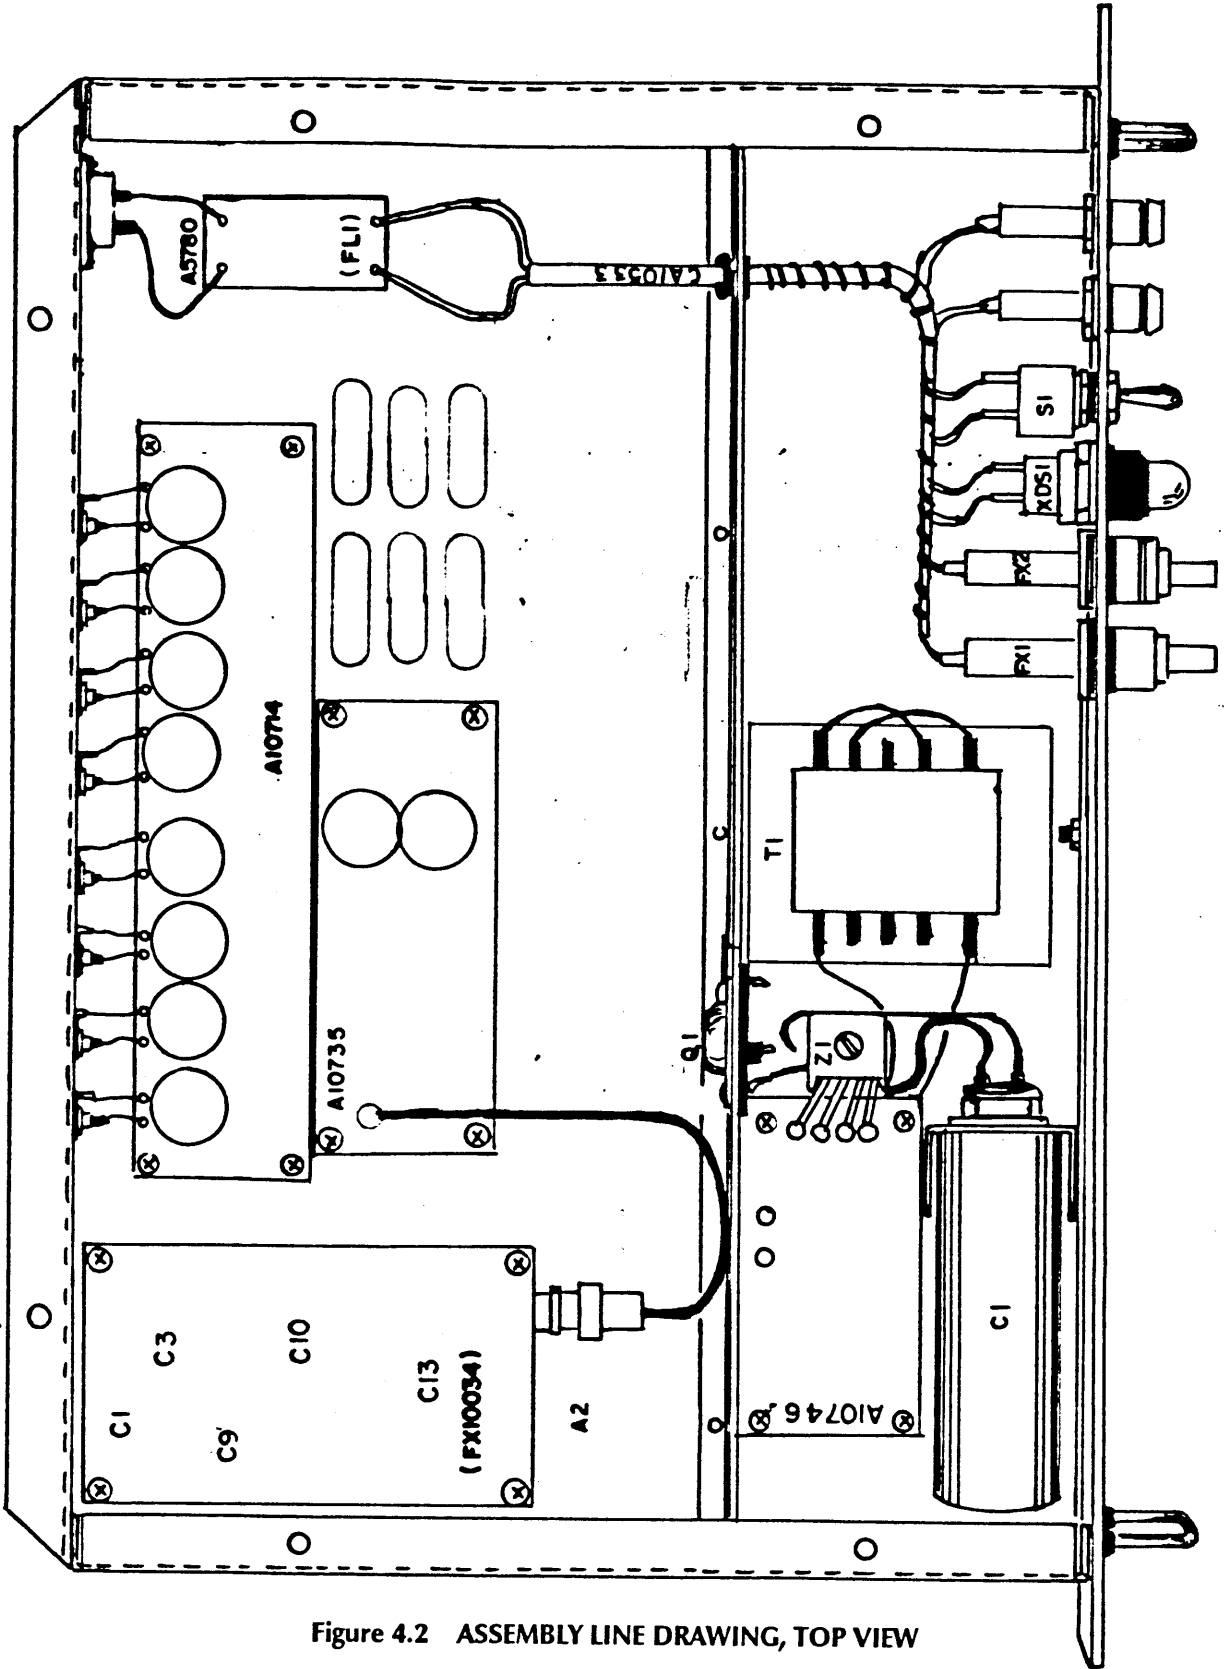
ASSEMBLY LINE DRAWING, TOP VIEW
